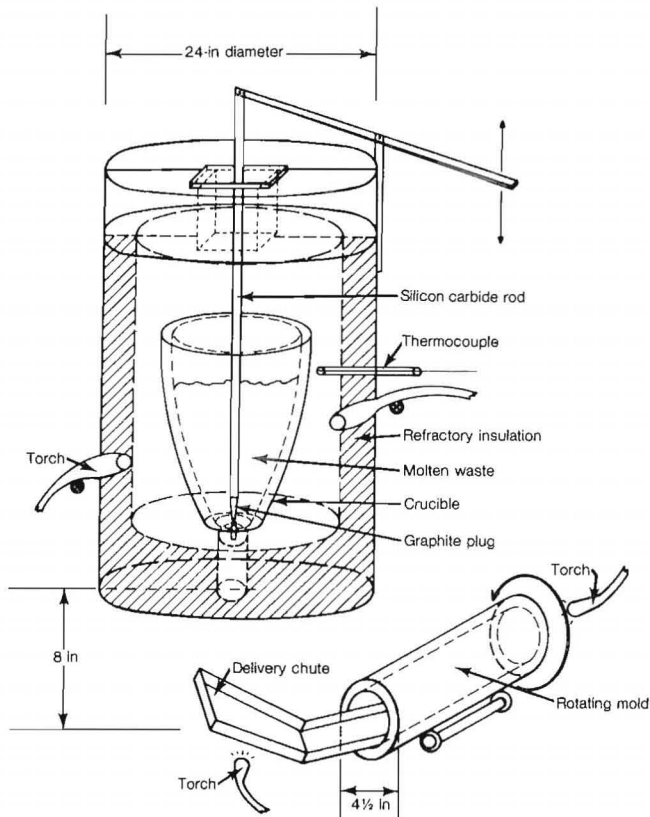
Elevated furnace used to melt glass and direct it into preheated, rotating mold below.
